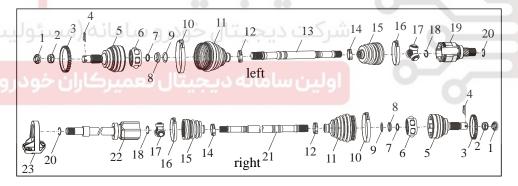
Exploded View of Home-made Engine Axle Shaft
